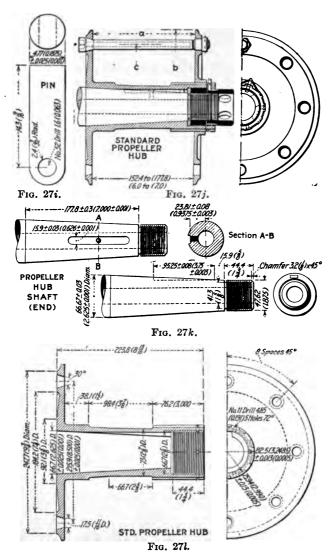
Locking pin. Fig. 27j.—Assembly of hub. Fig. 27k.—Engin shaft end. Fig. 27l.—Hub.
